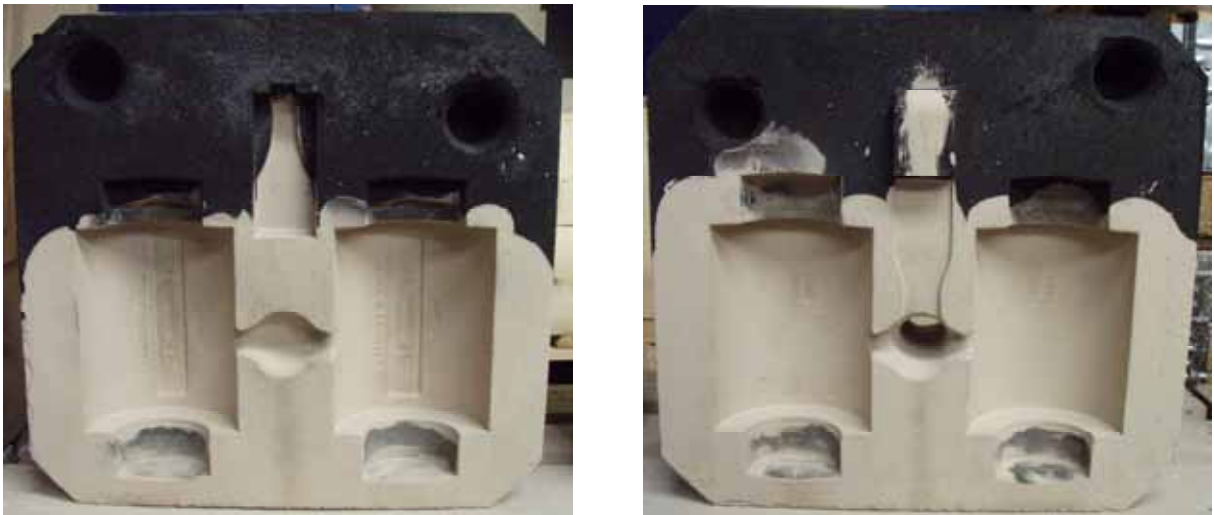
The two pictures show one of the moulds for the experiments. To the left: the drag. To the right: the cope.
